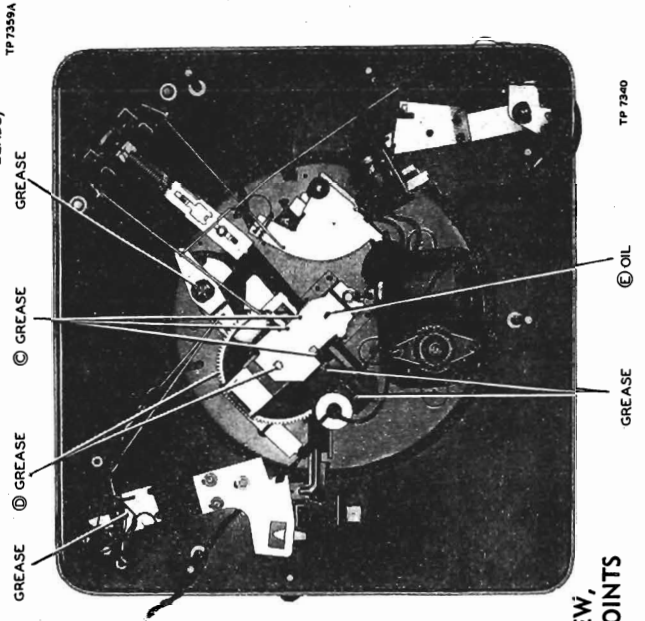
FIGURE ⑤ BOTTOM VIEW, SHOWING LUBRICATION POINTS
